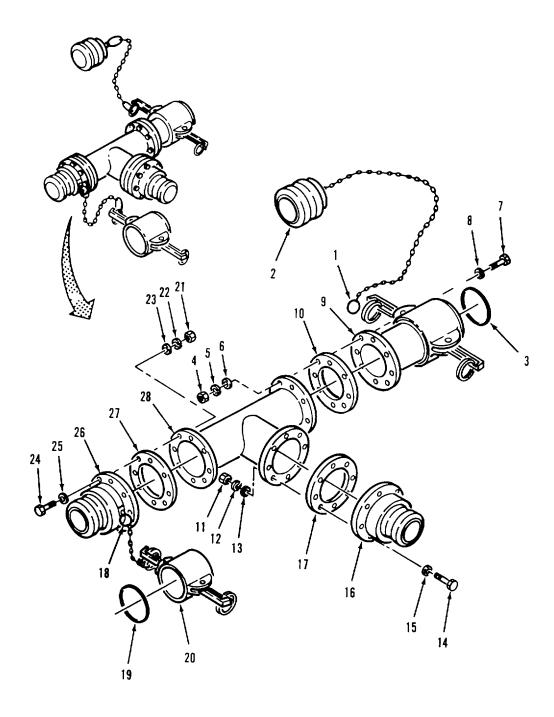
Tee Assembly (9117-Y1) Disassembly
